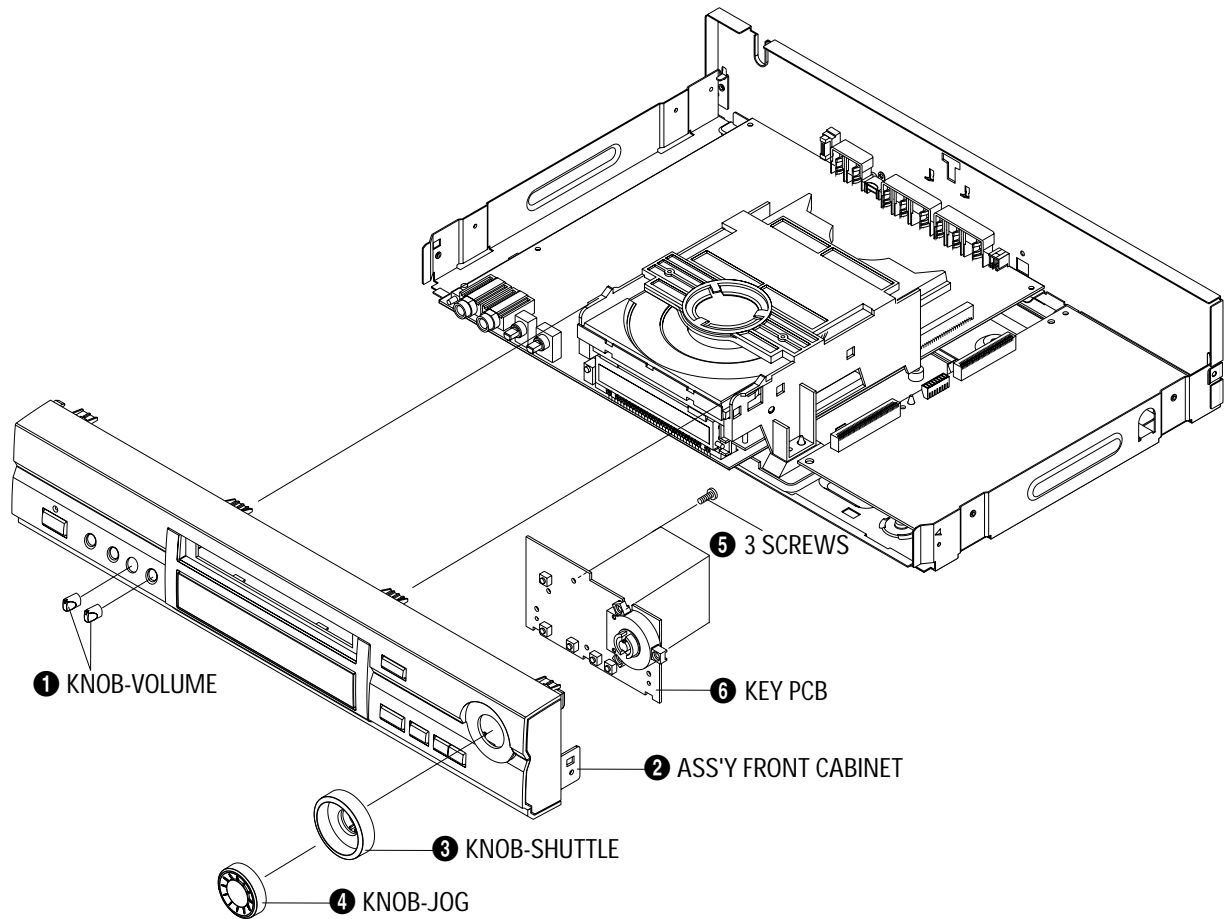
Ass'y Front-Cabinet, Key PCB Removal
